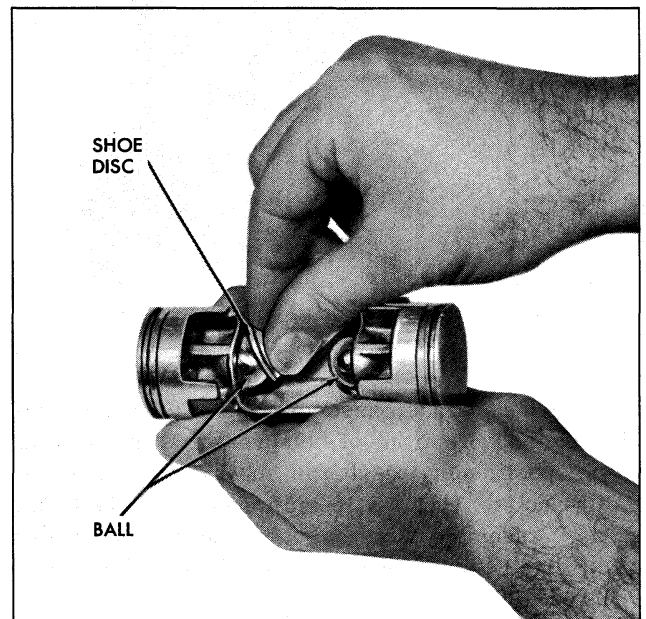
Zero Shoe and Ball at Front of Piston
